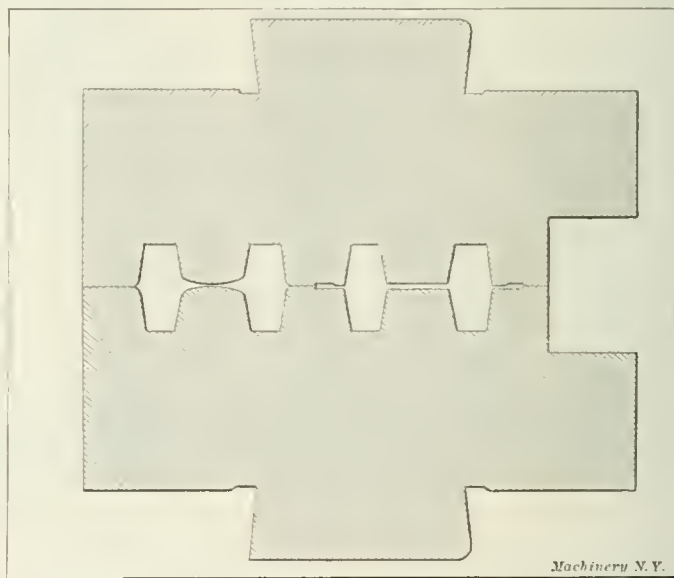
Sectional View of a Pair of Drop-forging Dies, showing the Flash
